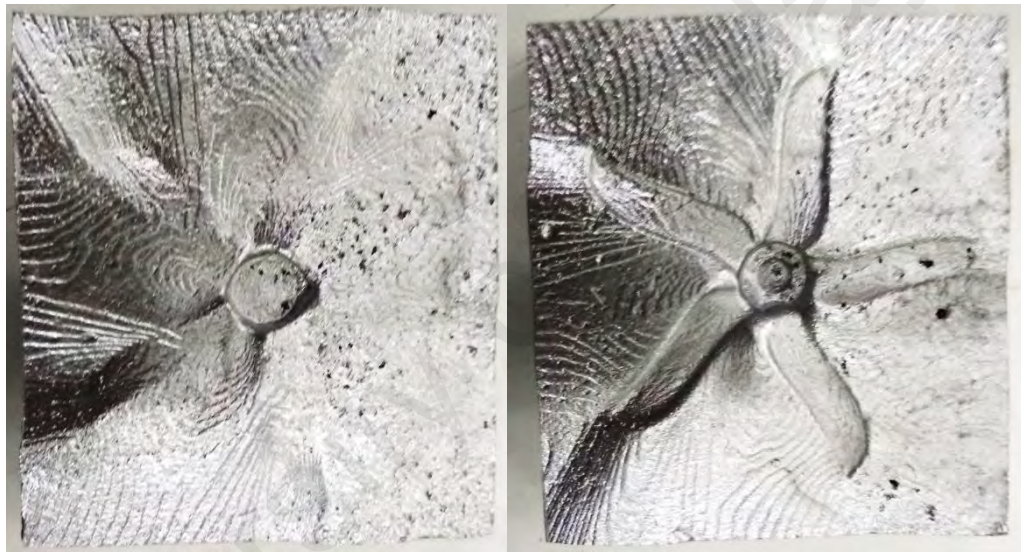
Aluminum Casted Part (Core & Cavity)
